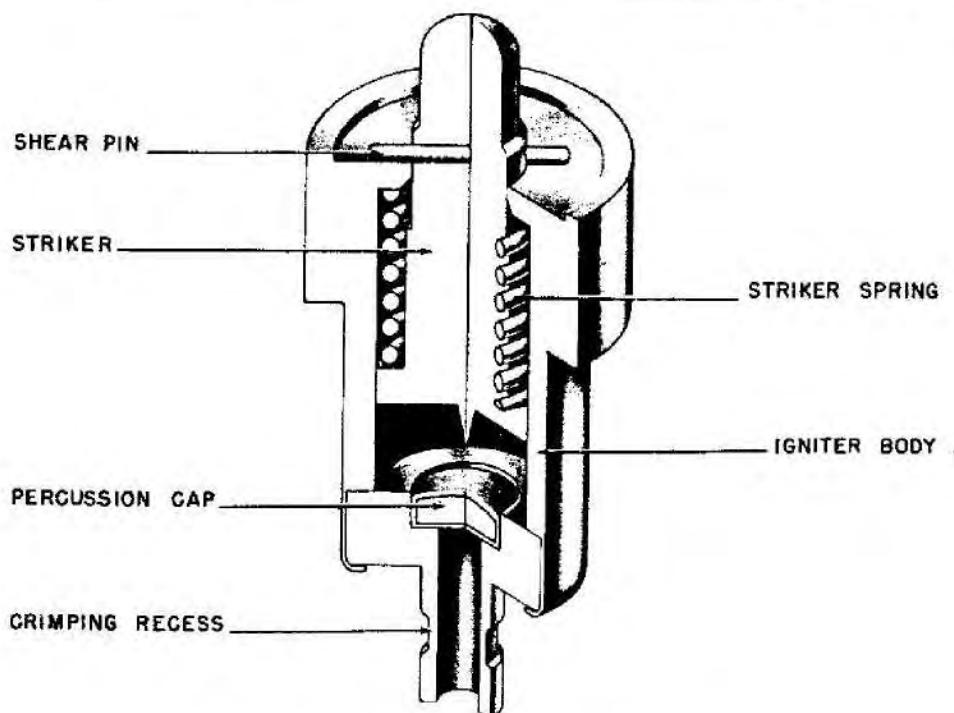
Mi. Z. 530 (e) Pressure Igniter
